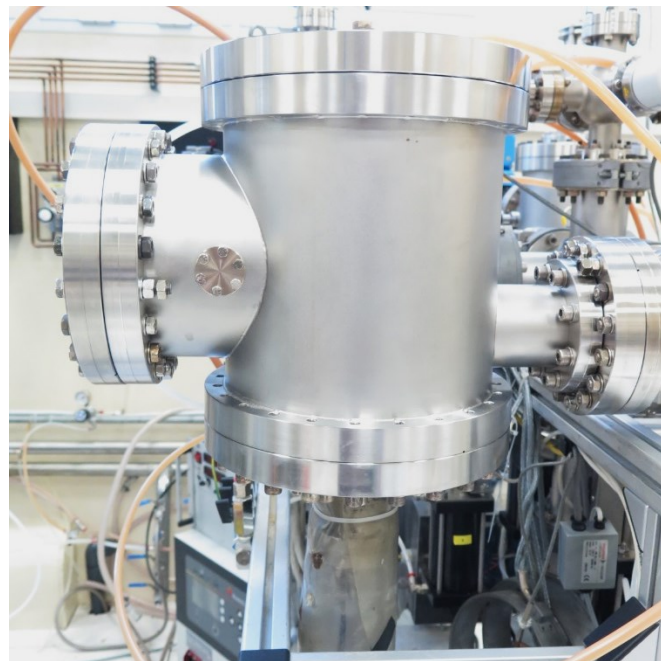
Vacuum chamber with IR lamp heated brazing furnace assembled.
